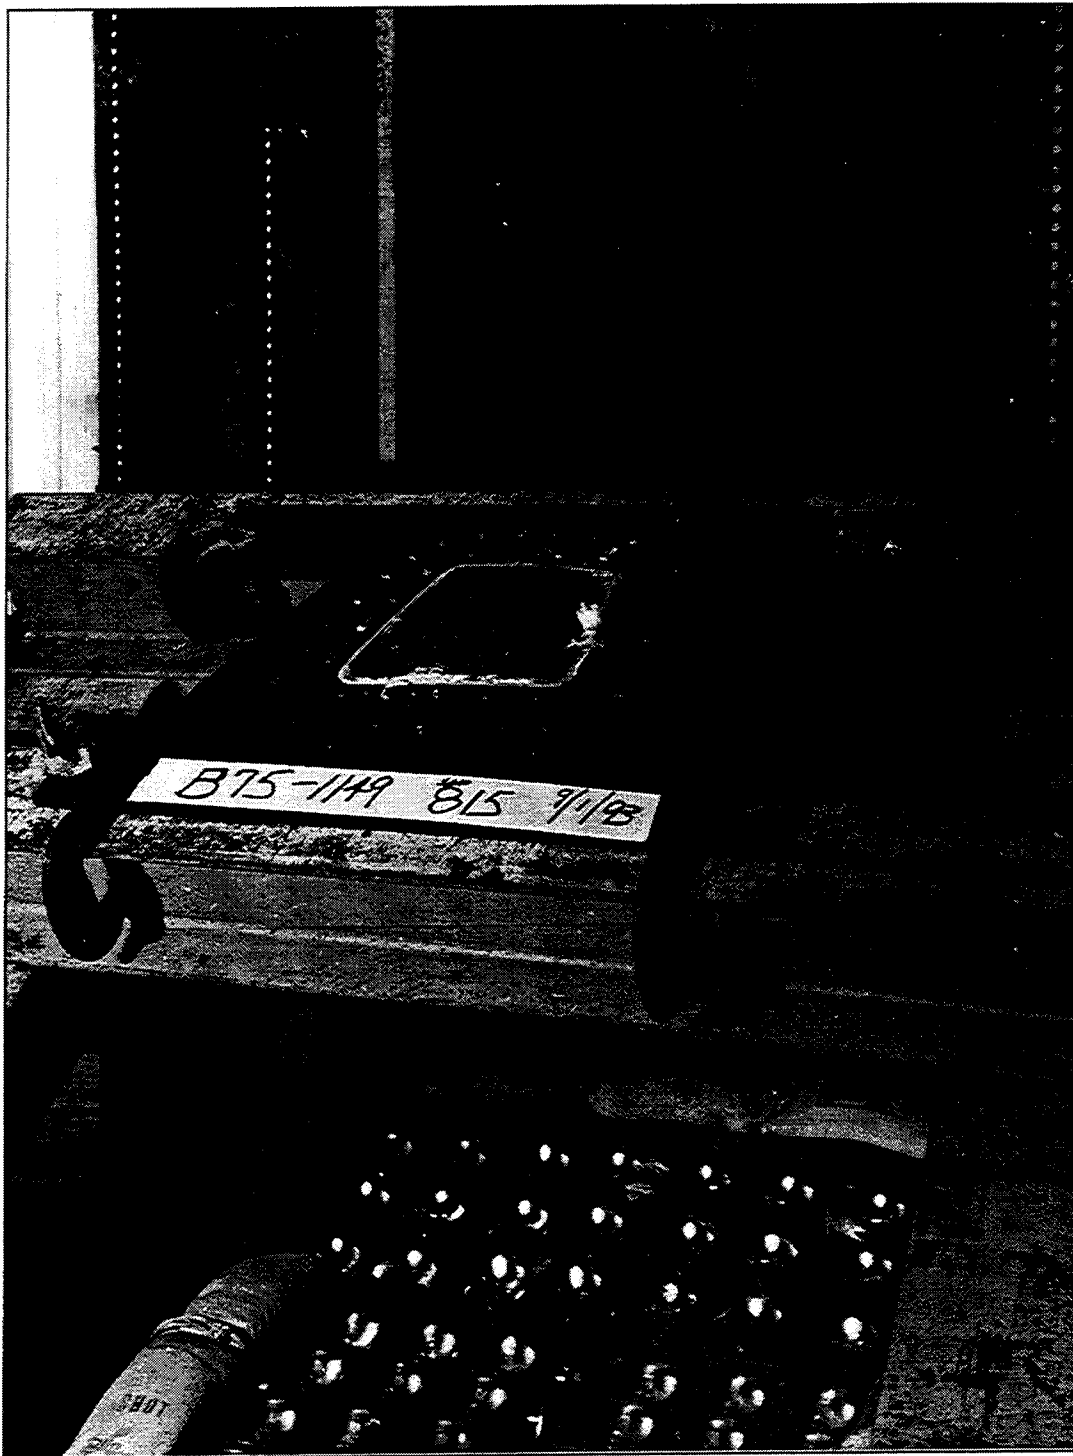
C/KC-135 #4 W/WS Showing Outboard Ply Failure From a 4-Pound Bird Impact at 247.5 Knots, Front View (Repaired W/WS, S/N B75-1149)
